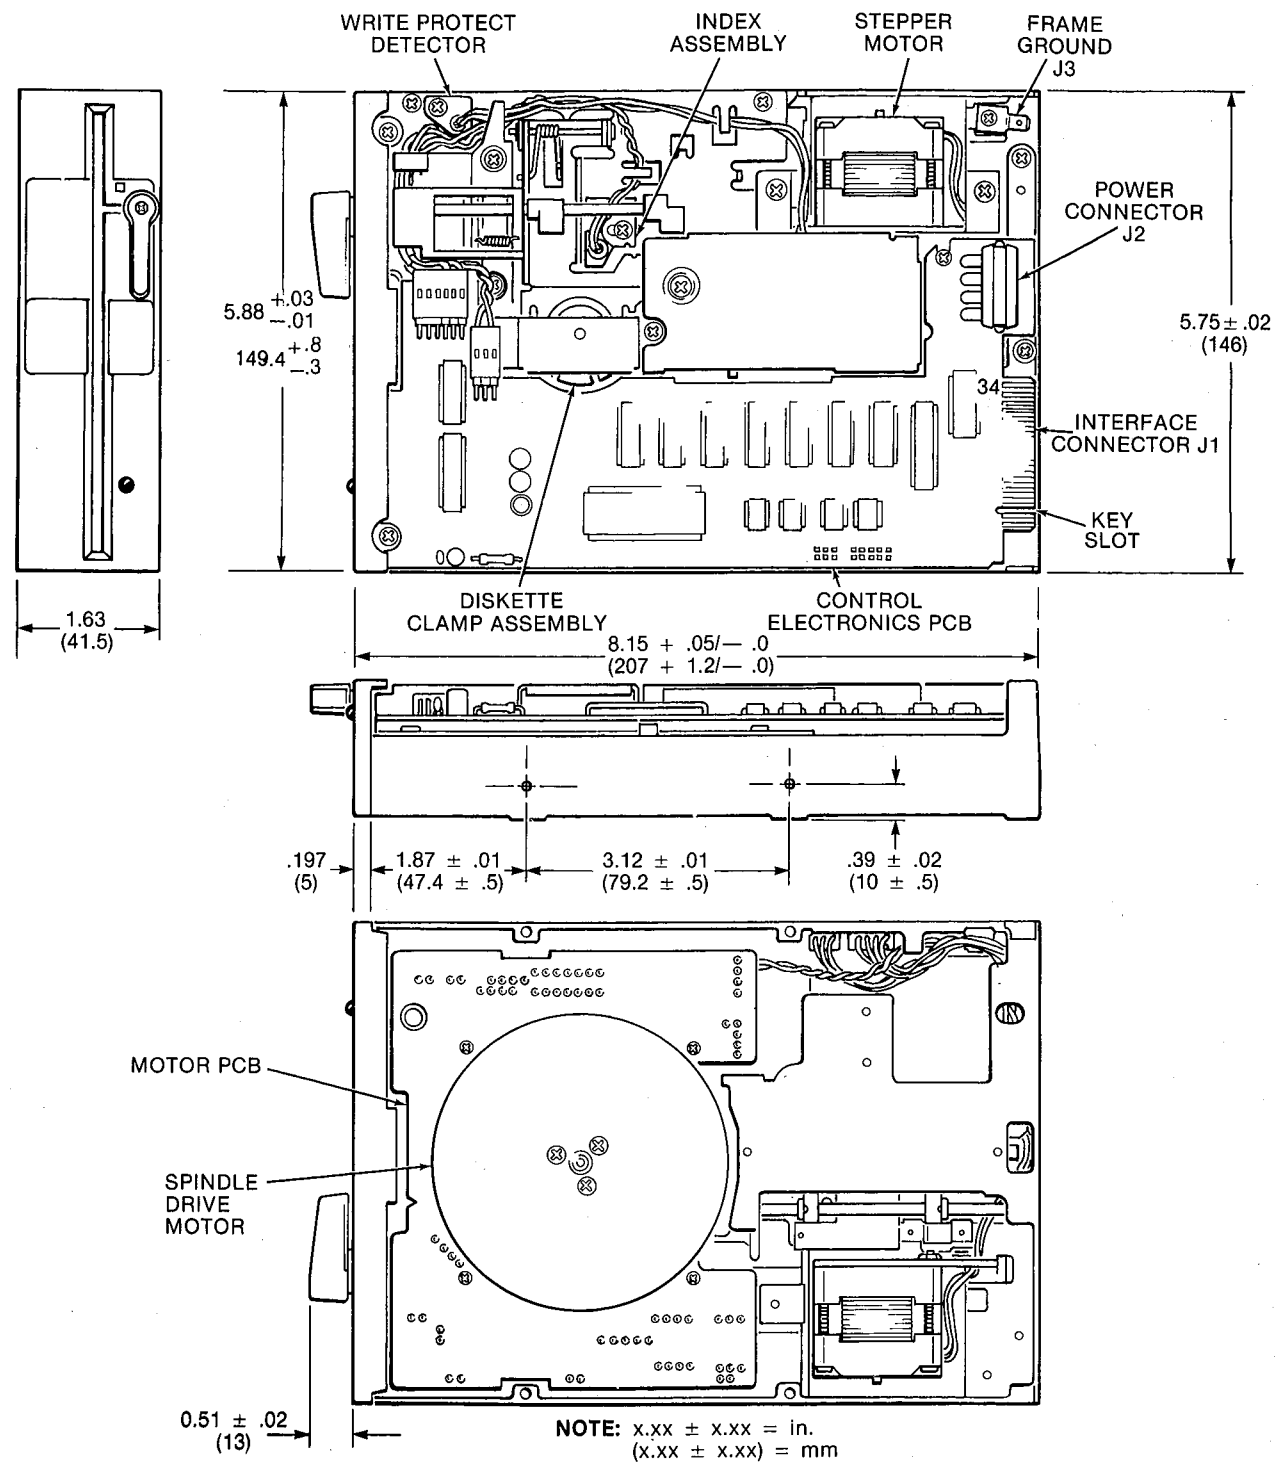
SA455/465 PHYSICAL DIMENSIONS
